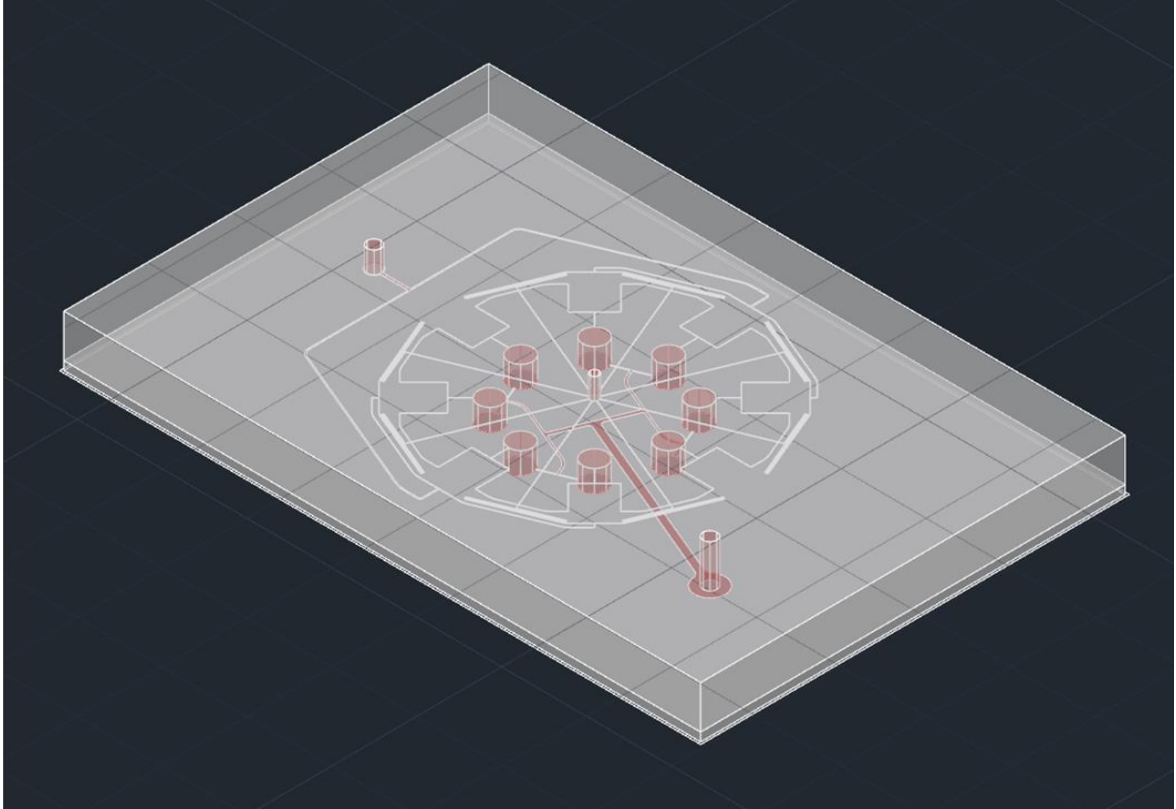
A 3D design of a multi-layer microfluidic device drawn by AutoCAD® to be printed by a 3D printer.
